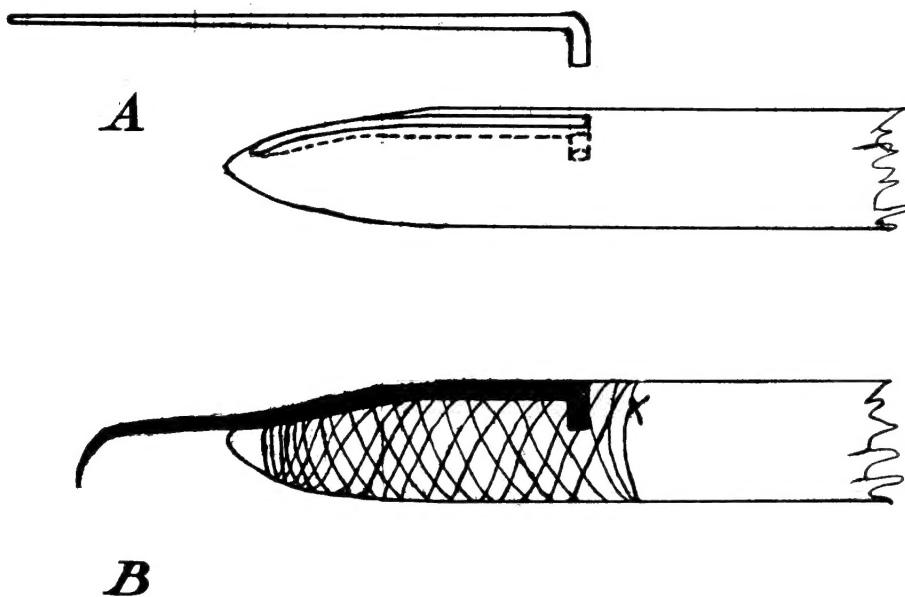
Details of assembly: A, Insect pin (with head cut off) bent at right angles to fit groove in brush handle. B, Assembled brush handle and needle.
